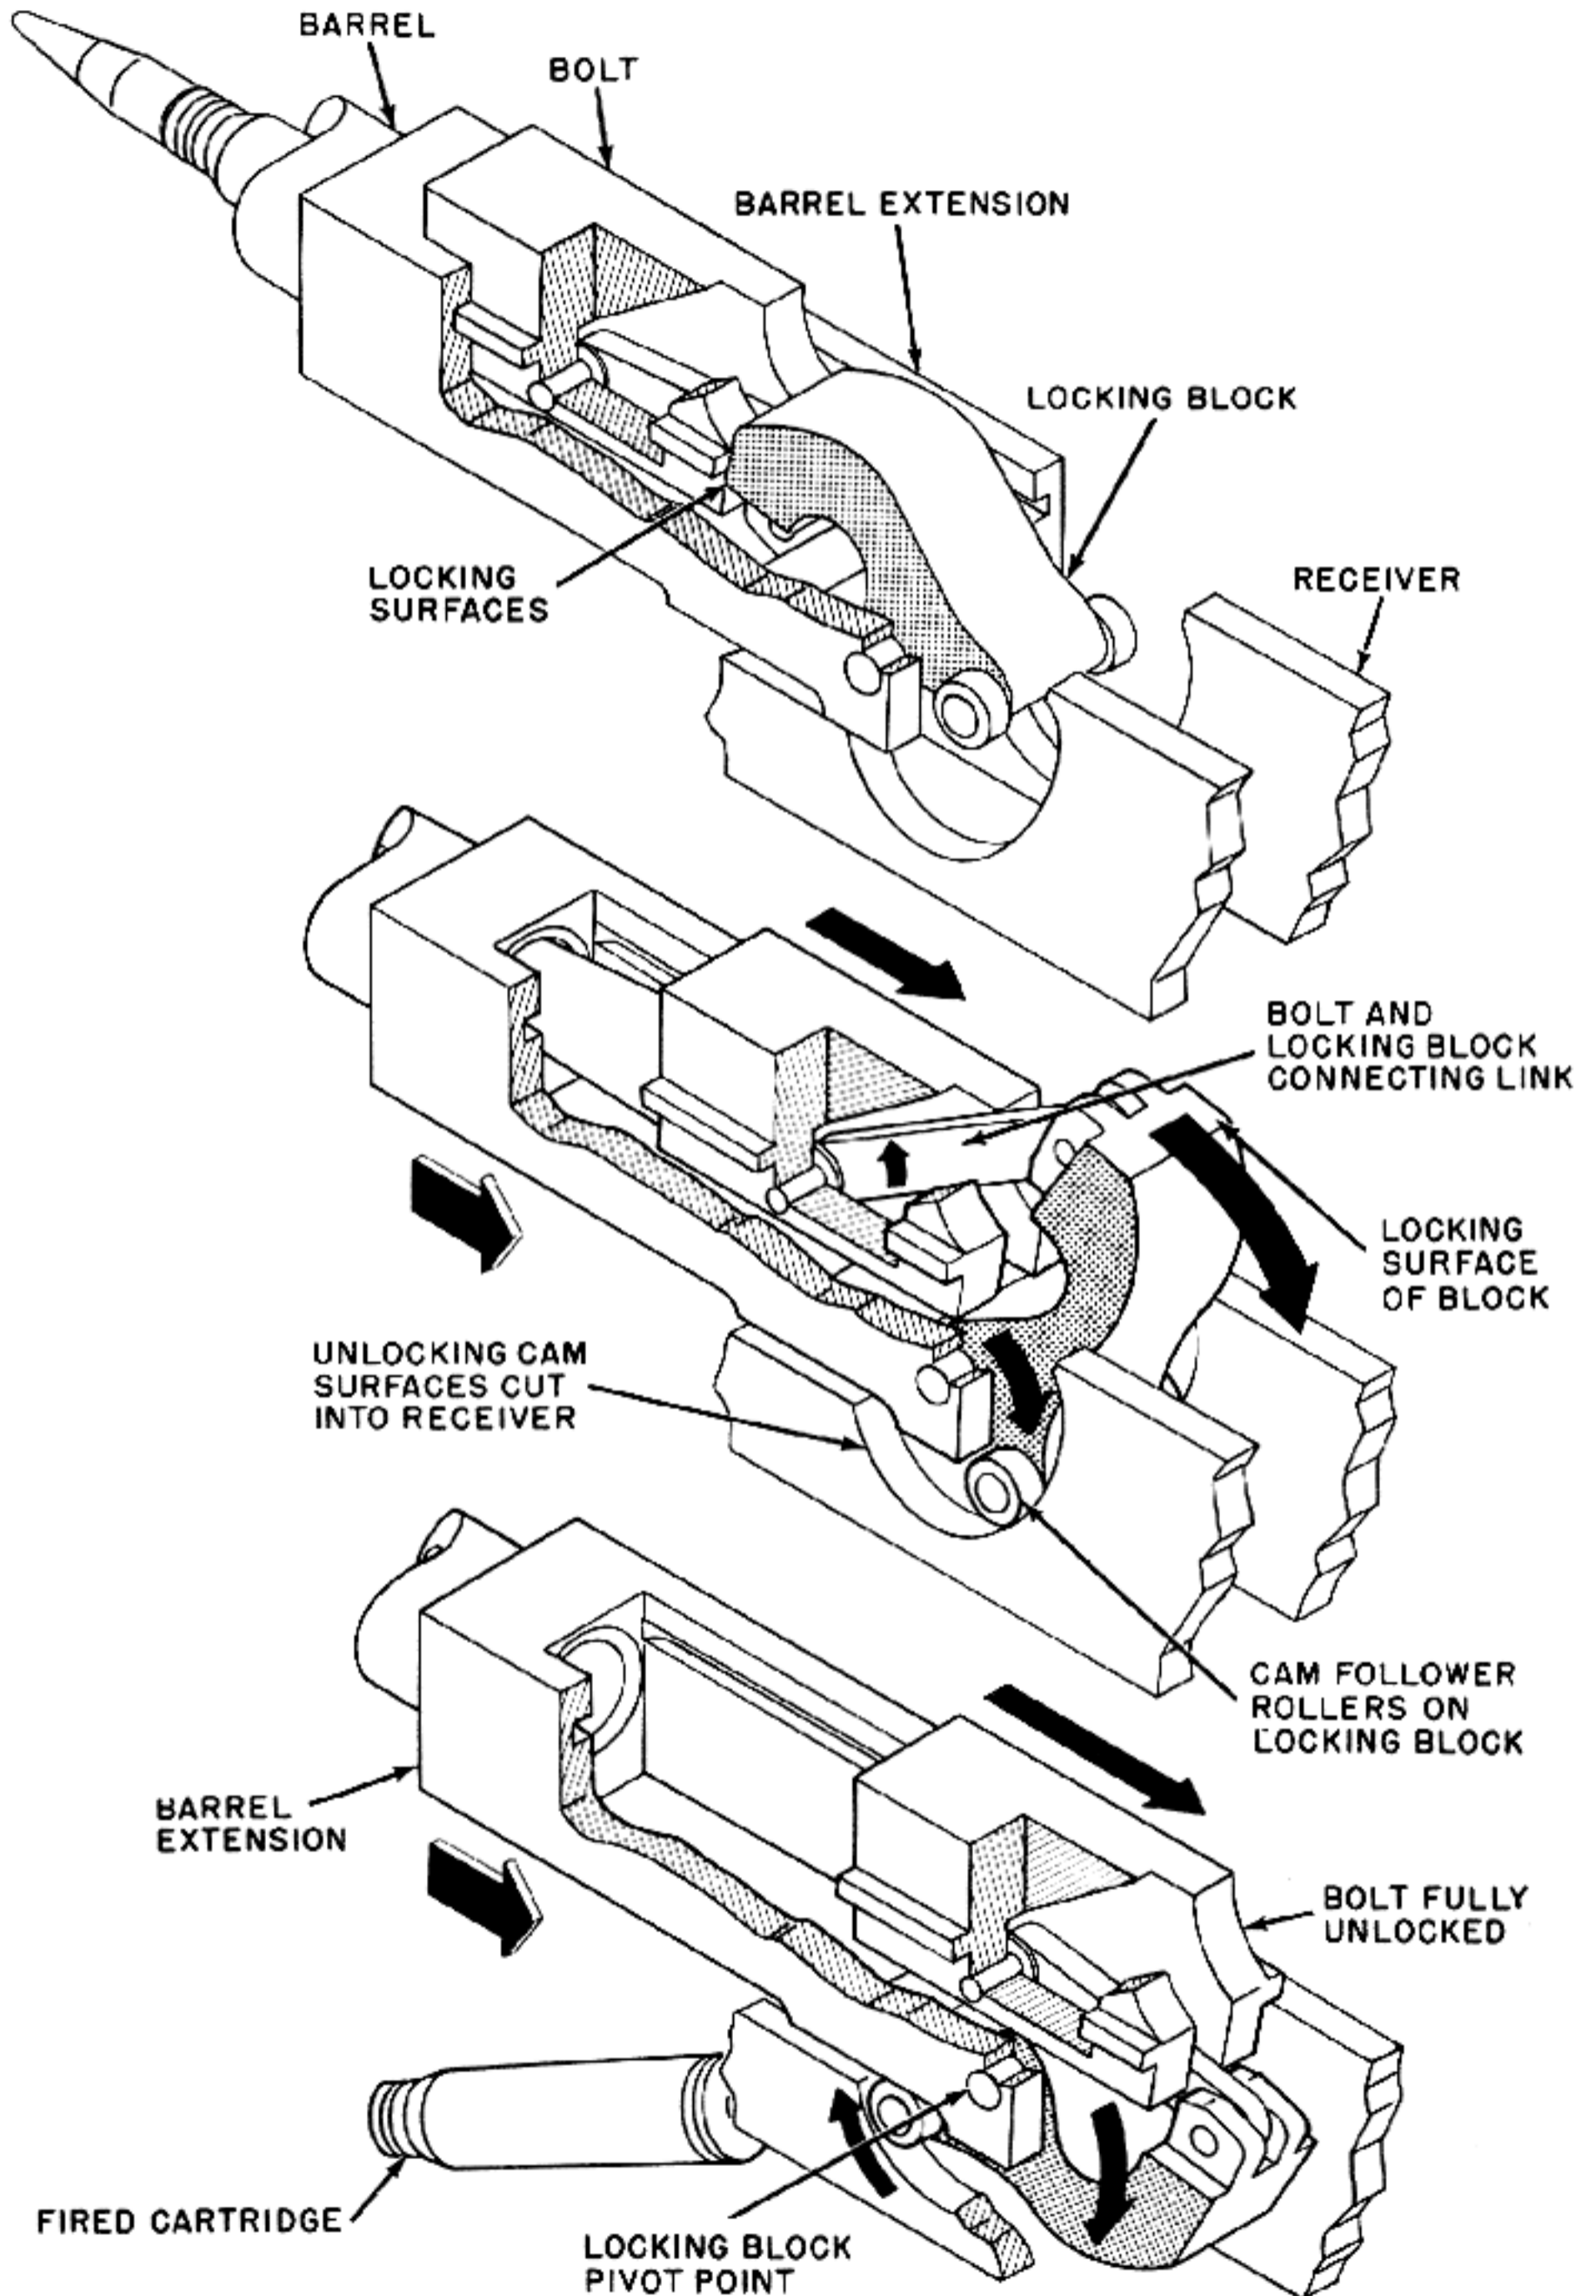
Bolt Is Unlocked by Action of Cam Followers on the Locking Block Recoiling Against Cams in the Receiver.
